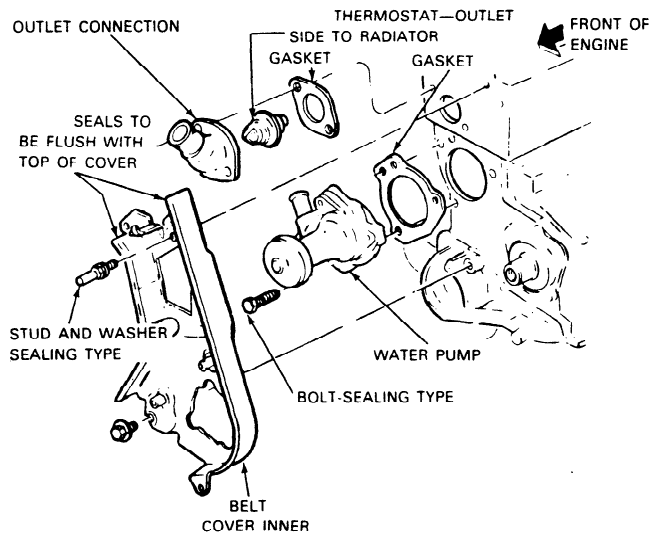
Water Pump, Thermostat and Inner Timing Belt Cover
